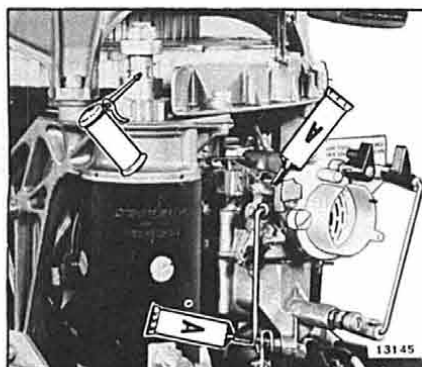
Choke Linkage and Starter Pinion Gear Shaft
